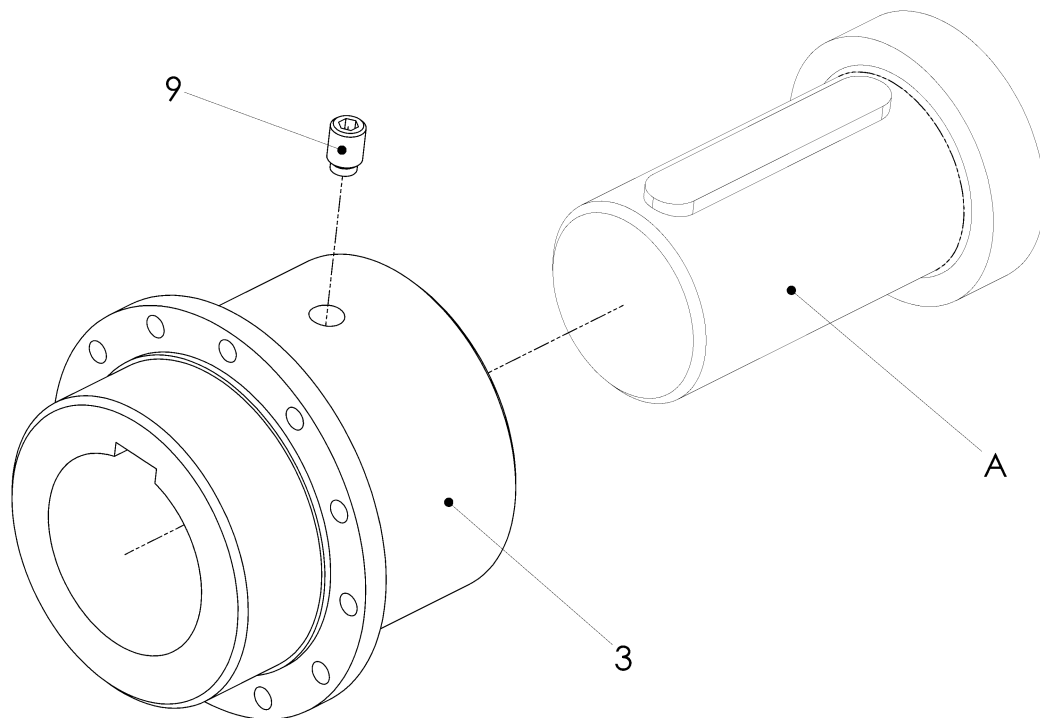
Mounting the hub with cylindrical bore and keyway
